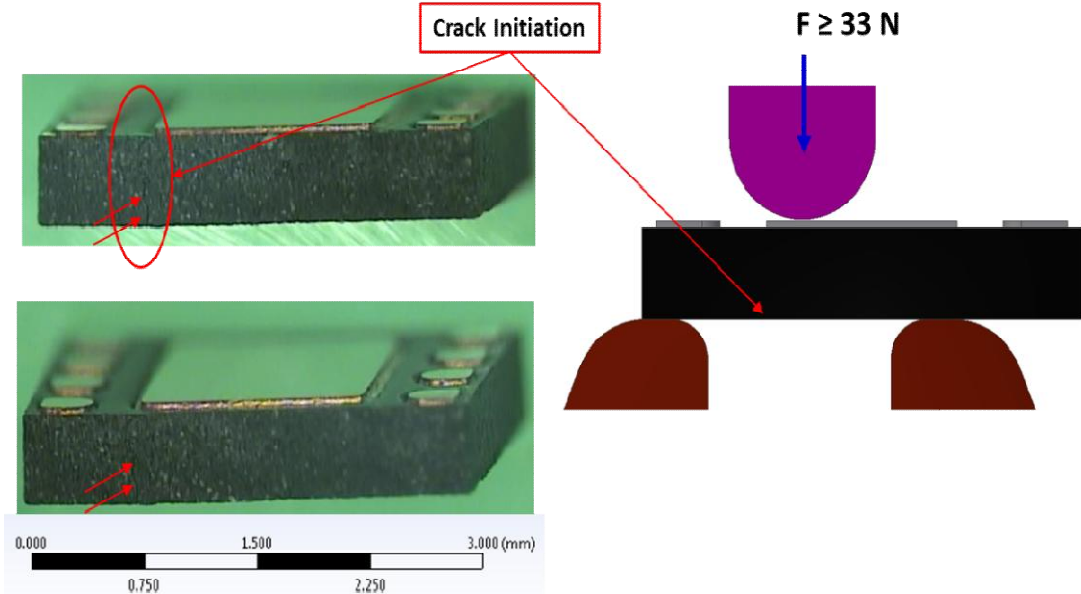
Crack signatures for the tested package not mounted on PCB in Fig. 5c
